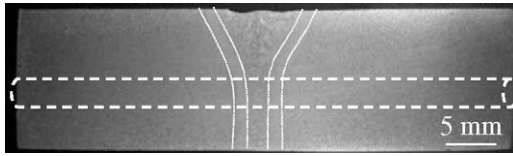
Cross-sectional view of EB welded joint.
